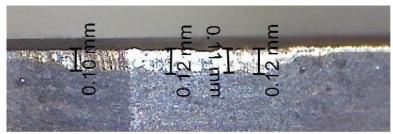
Flank wear after machining, tool CNGX 1204L025-18AXA grade 7025.
